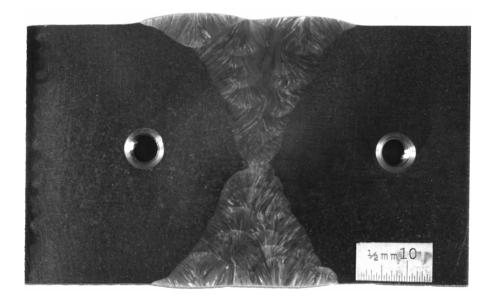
Cross Section of Weld in Mockup BWRVIP-C
